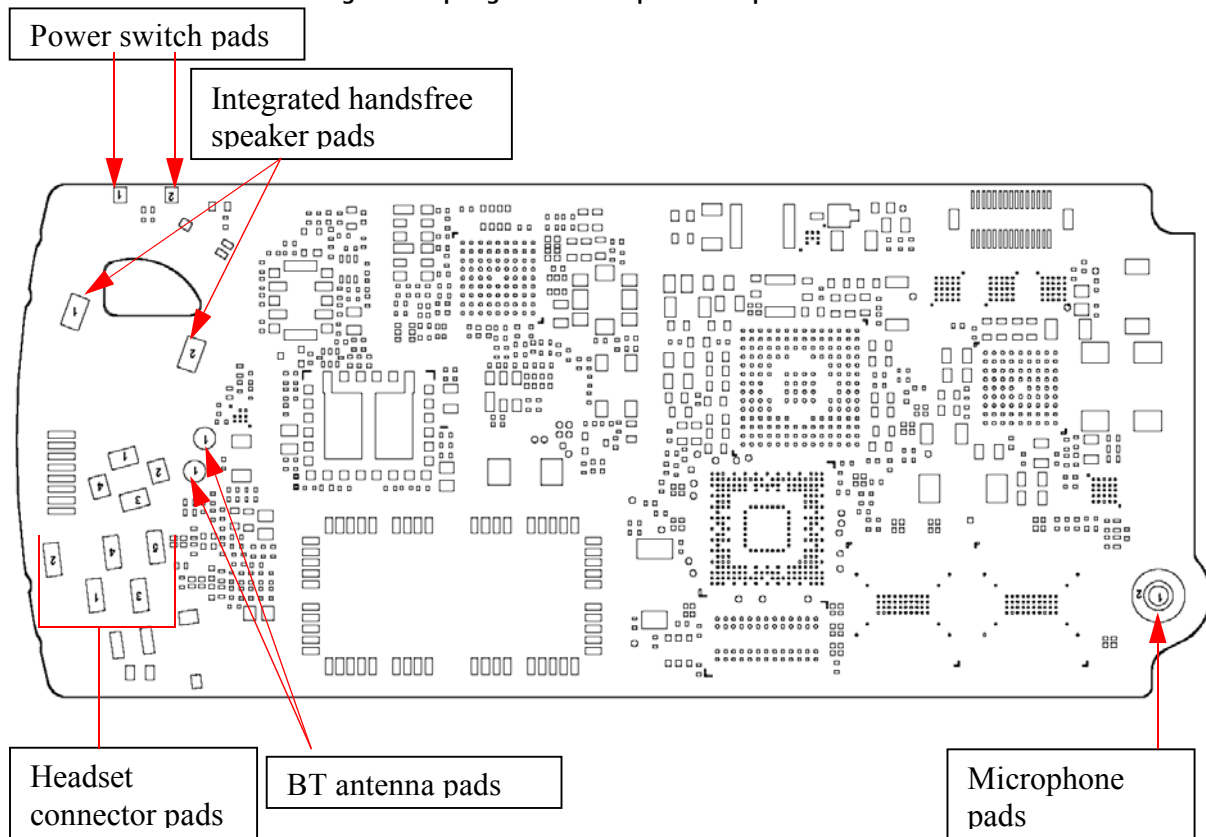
Spring connection pads on back side of LG4 and flex cable solder pads
